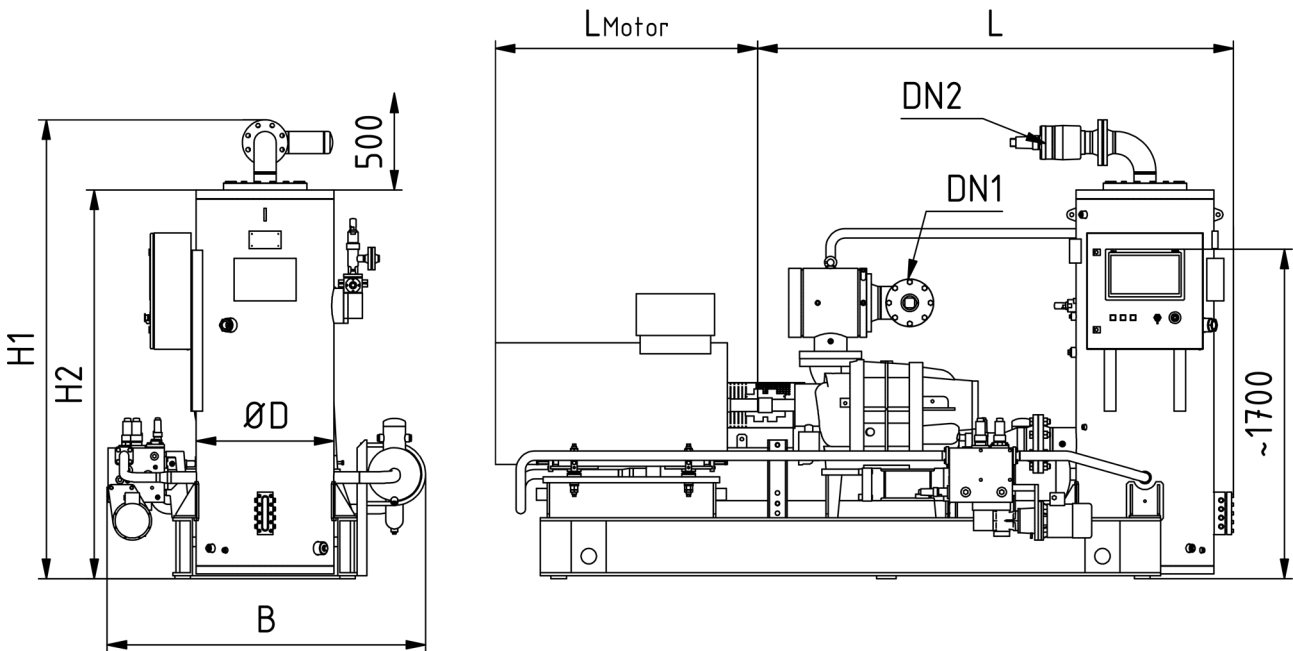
GEA Grasso SP1 compressor frame size V, W, Y
